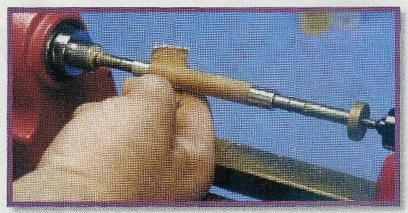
Starting with 80-grit sandpaper, begin to sand your blank.
